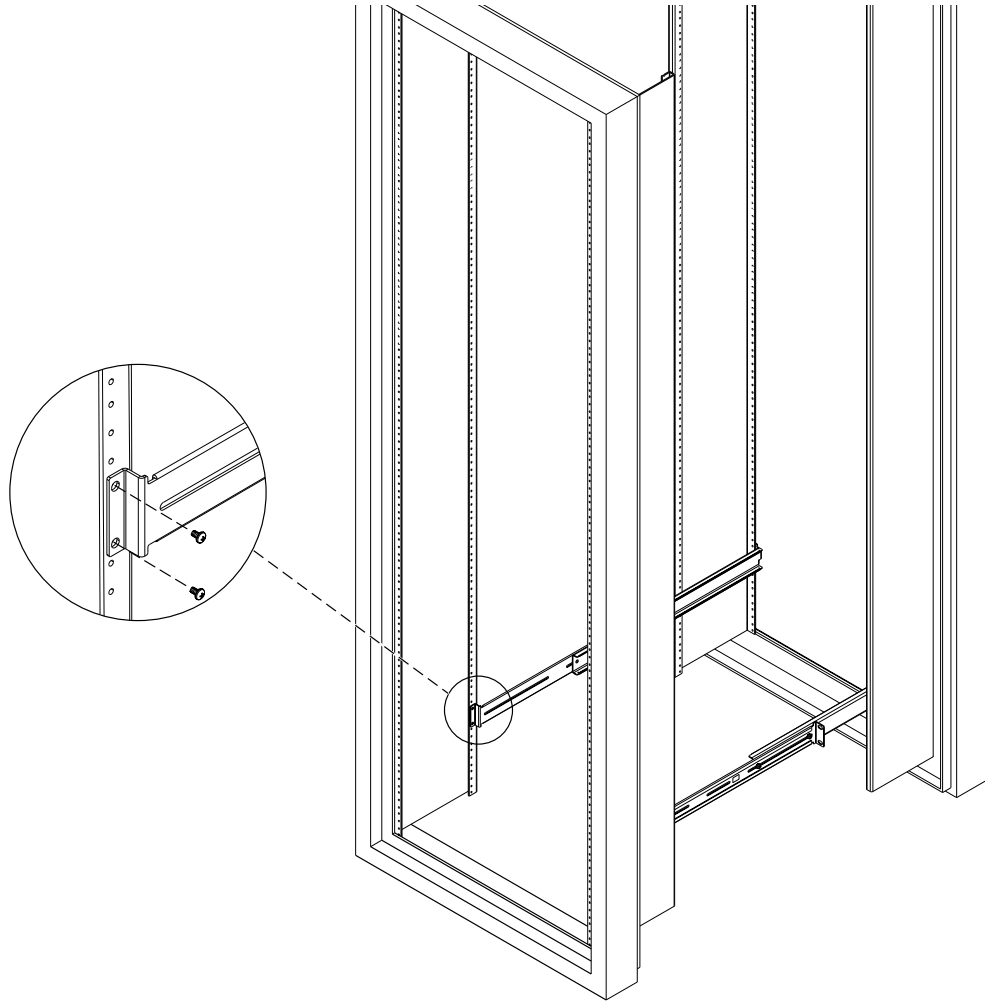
Fastening the Slide Mounts to a Sun StorEdge 72-inch Tall Rack – Rear View
